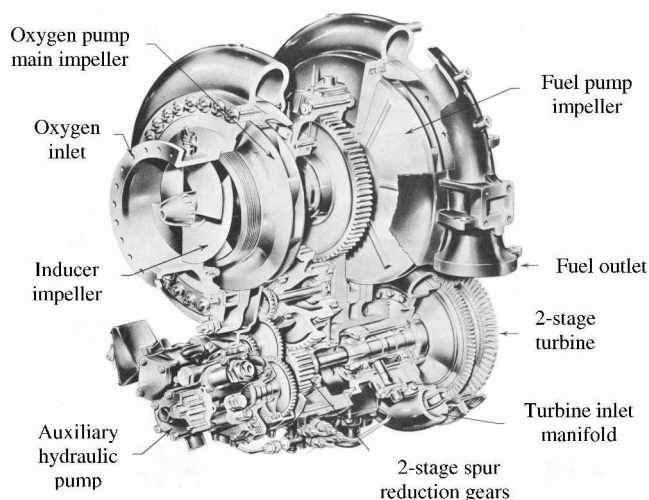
Sectioned view of the type of turbopump with a gear case used in the Rocketdyne Thor, Jupiter, Atlas booster, and H-1 engines (from Ref. 2).
